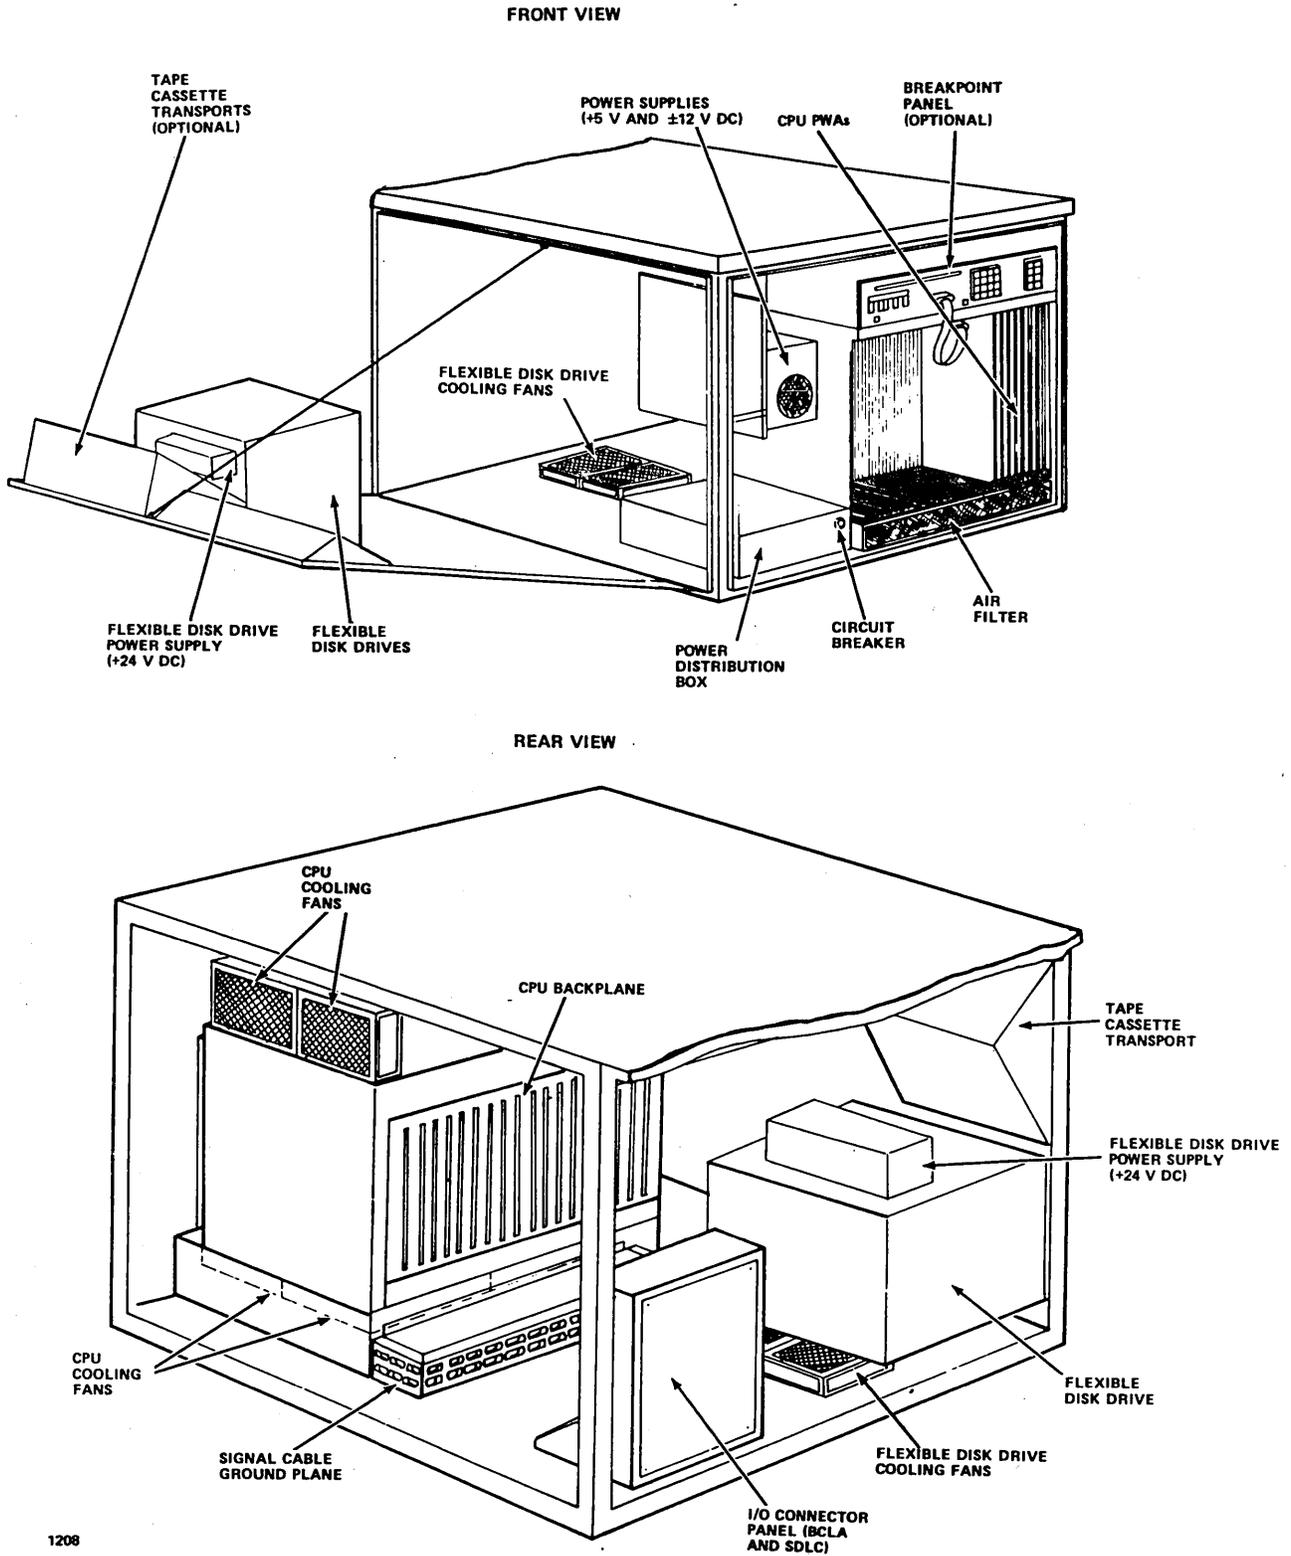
Single-Processor Cabinet Equipment Location, (Interior Views)
